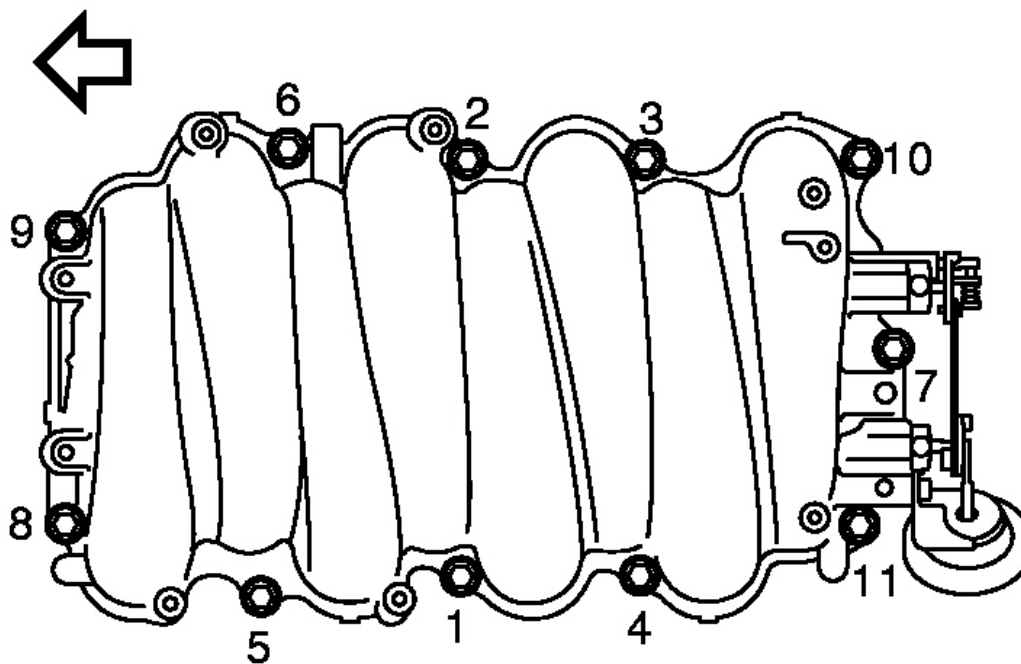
Identifying Tightening Mounting Bolts In Sequence (Lower)
